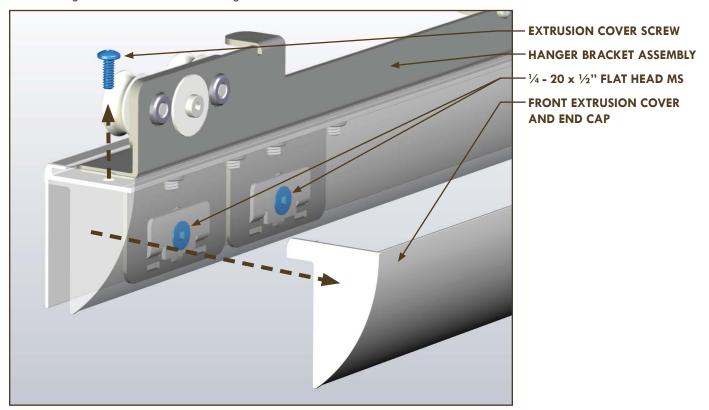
Remove two (2) cover screws (highlighted in blue) and Front Extrusion Cover. Remove all four (4) Flat Head Robertson Machine Screws (highlighted in blue).
